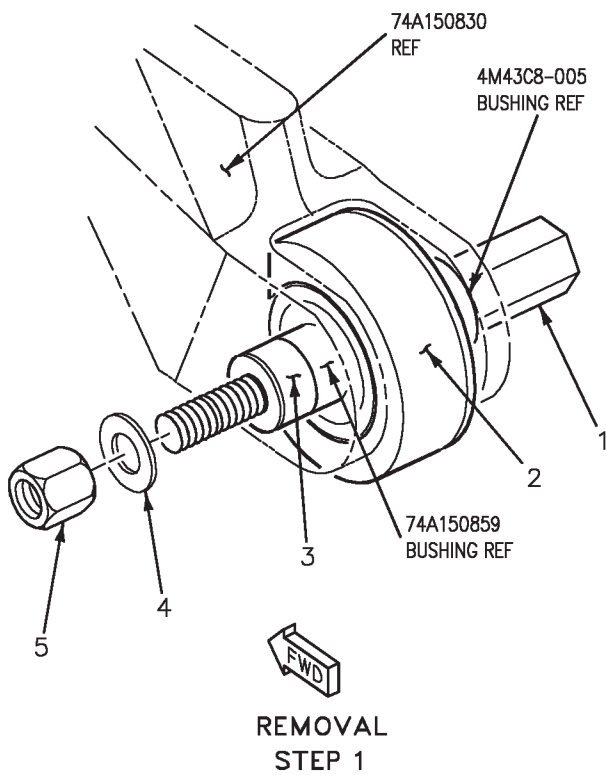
Bushing Removal, Installation, and Reaming (Sheet 23)
